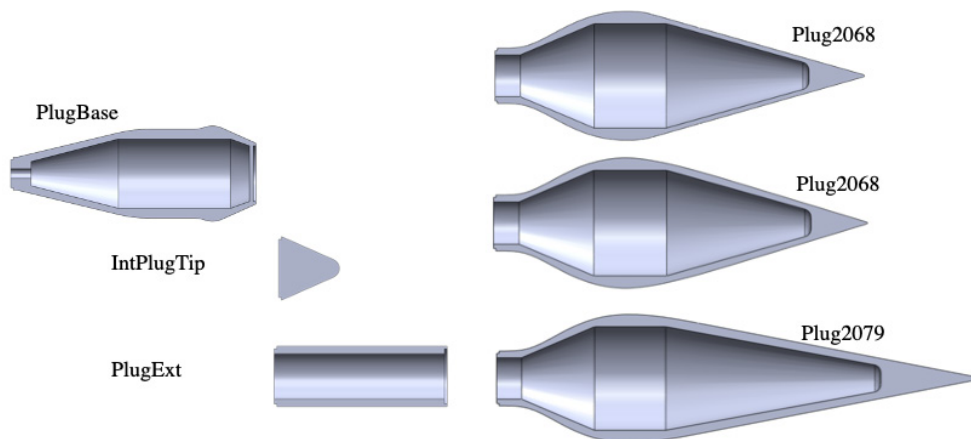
Plug components: PlugBase (common), IntPlugTip for internal plug configuration, short plug with shock ($p2068$), short plug without shock ($p2069$), long plug ($p2079$), PlugExtension for long duct configuration.
